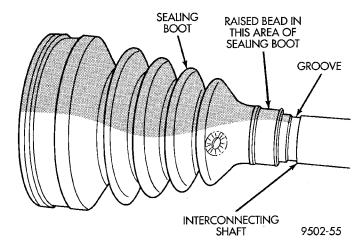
Sealing Boot Installation on Interconnecting Shaft
